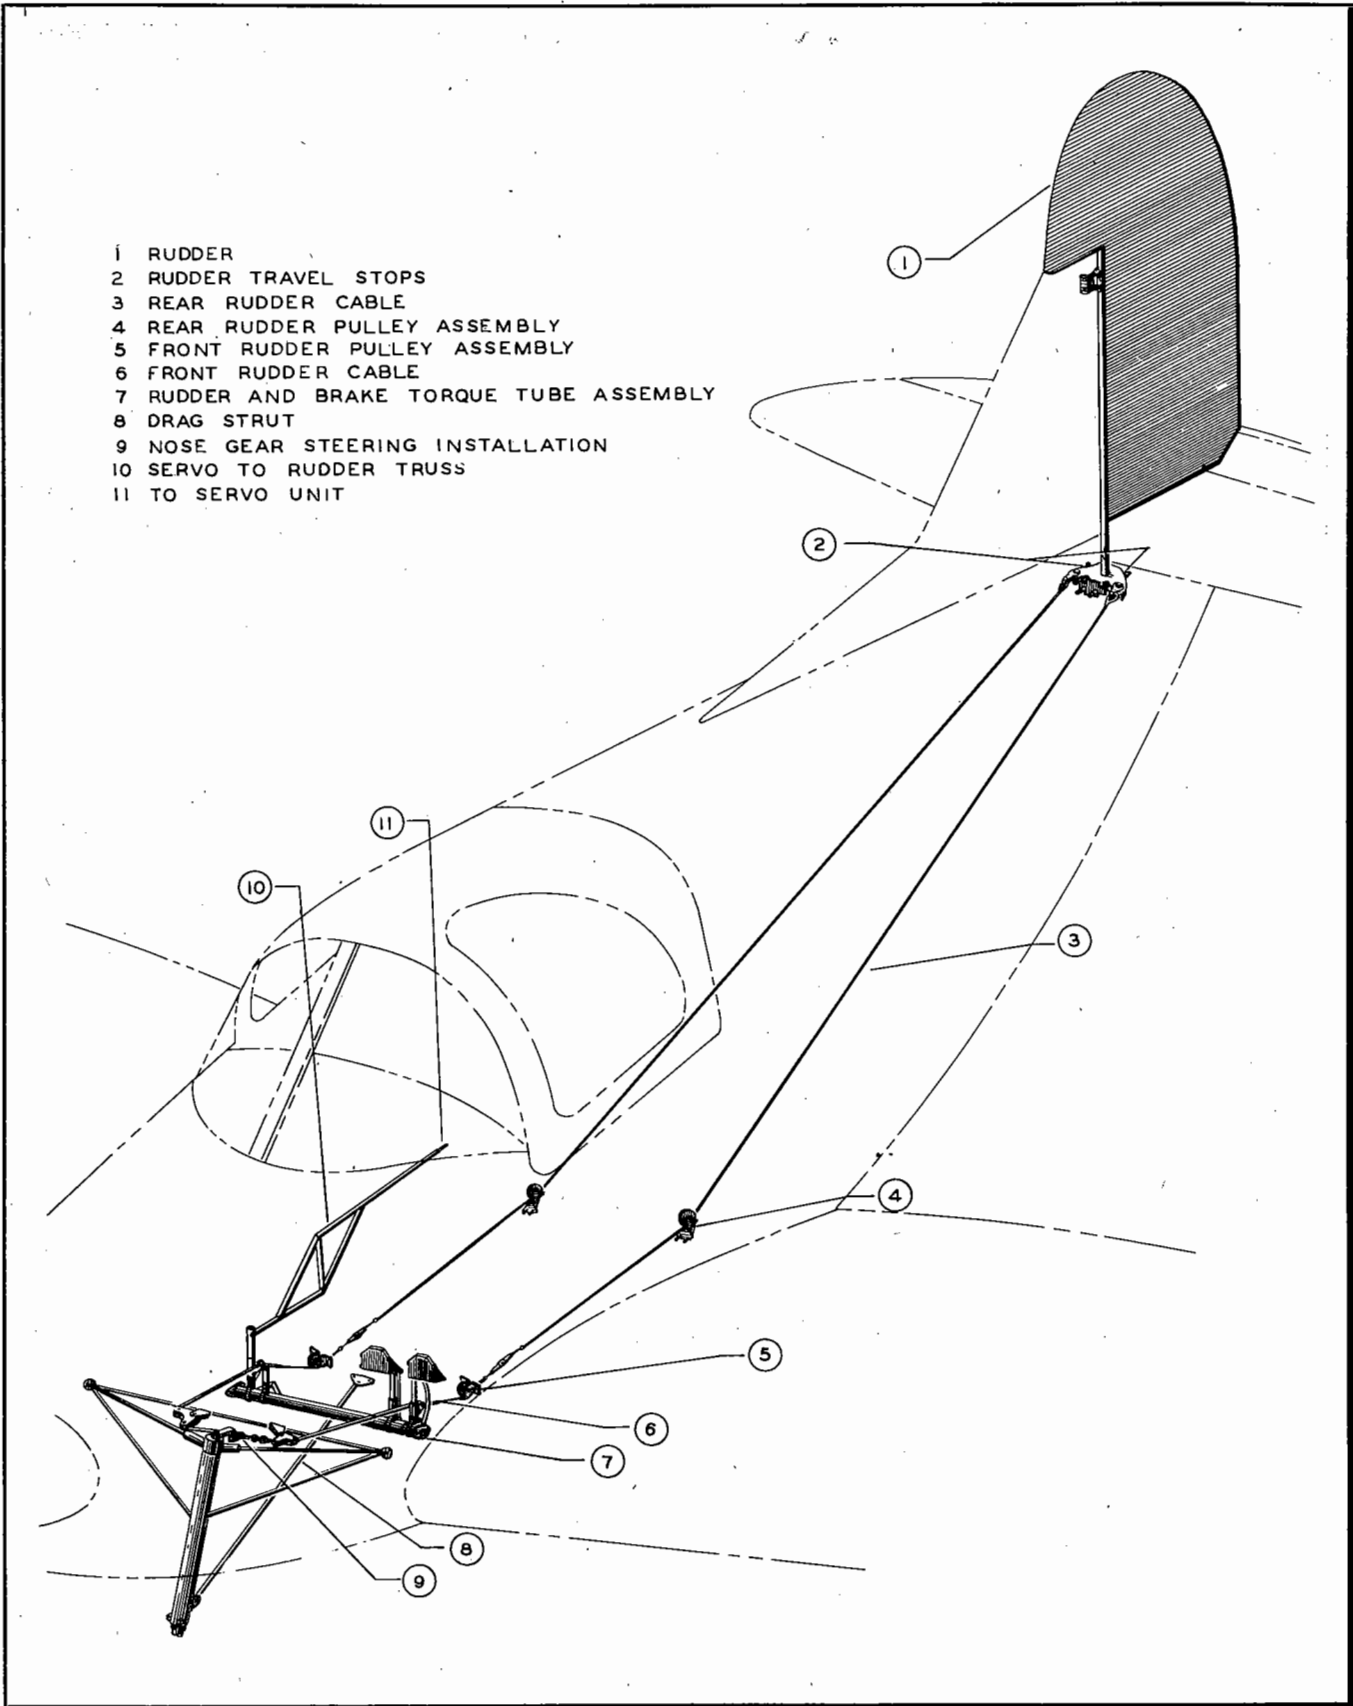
Rudder and Nose Wheel Servo Installation—TDC-2
